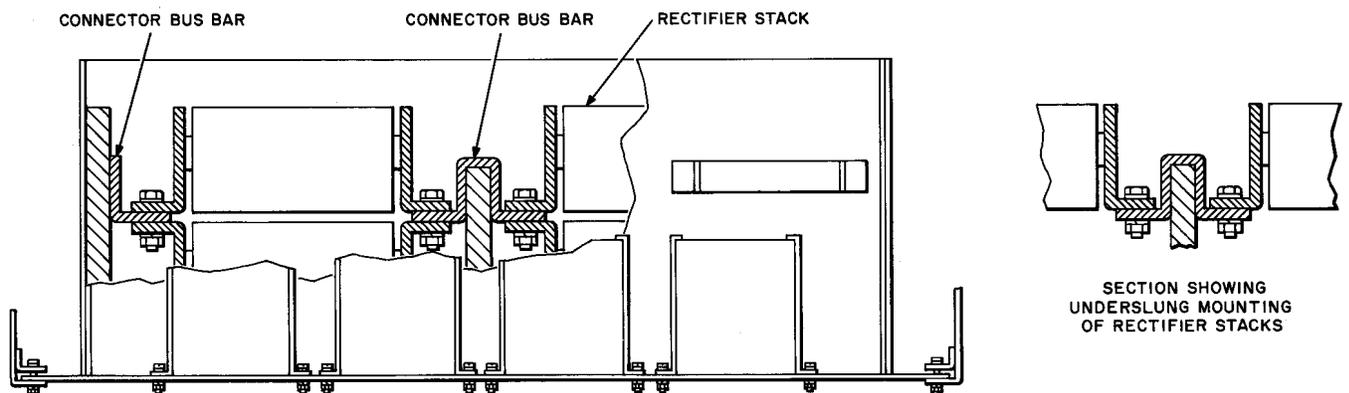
Rectifier Stack Basket Assembly Showing Stacks in Upper and Lower Halves of Basket
